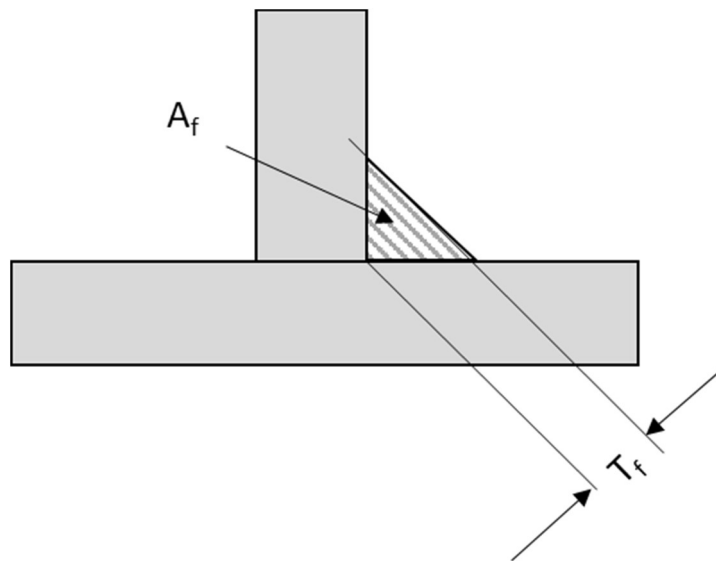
Diagram showing fillet weld area and throat thickness
